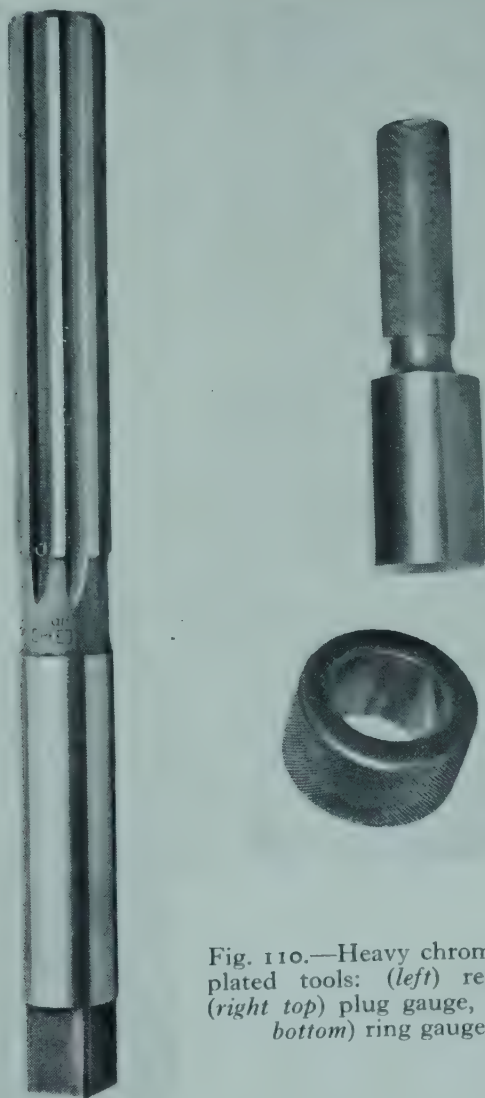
Heavy chromium-plated tools: (left) reamer, (right top) plug gauge, (right bottom) ring gauge
